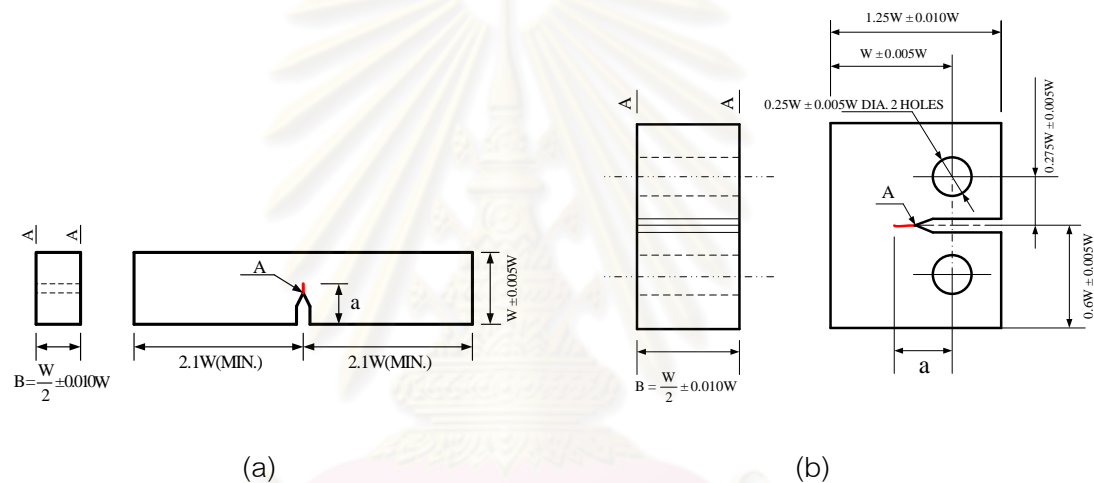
Schematic of specimen configuration and crack: (a) single-edge notched bending (SEB) specimen and (b) compact tension (CT) specimen
